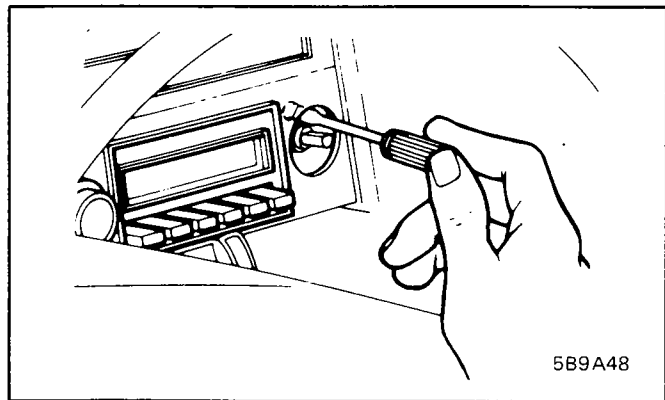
A-44 Adjusting Trimmer for Best AM Reception
